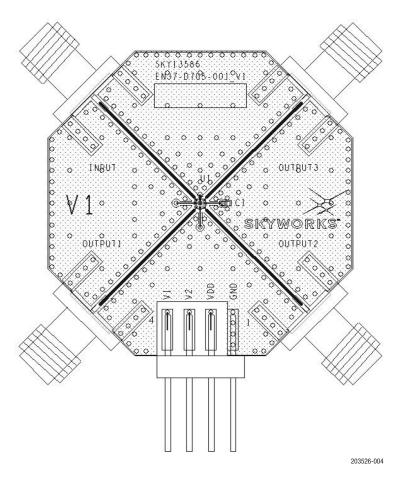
SKYA21039 Evaluation Board Assembly Diagram
